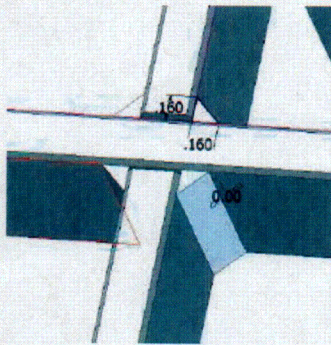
Handle Assembly Showing Fillet Weld Detail.
